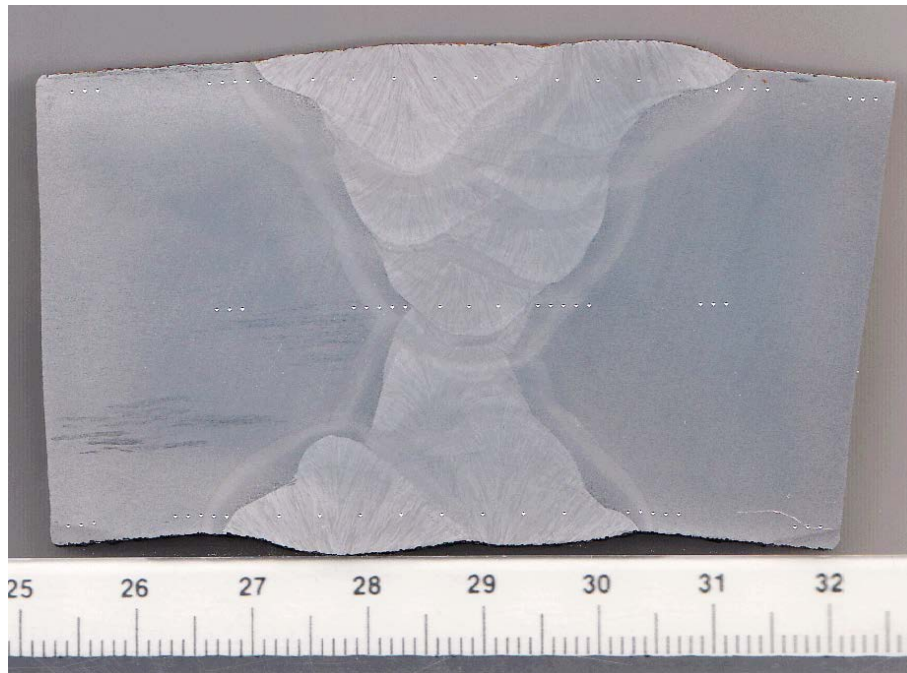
Macrograph of the longitudinal weld in L-X60 with residual imprints from hardness measurements.
